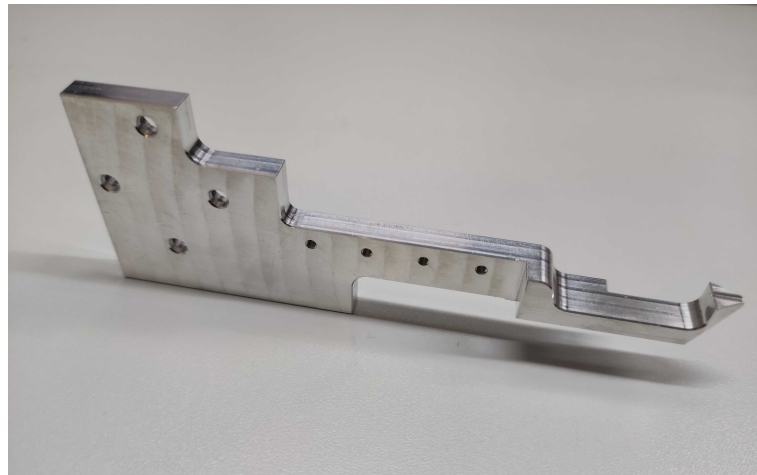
Second fiber mirror holder for the VFM setup, fabricated in our institute’s mechanics workshop out of aluminum. The large holes are designed for mounting the holder onto a translation stage, while the smaller holes are intended for attaching an actuator, which stabilizes cavities built with the setup. The geometry was slightly altered from the original design to account for a new piezo stack used, to be able to observe additional free spectral ranges.
